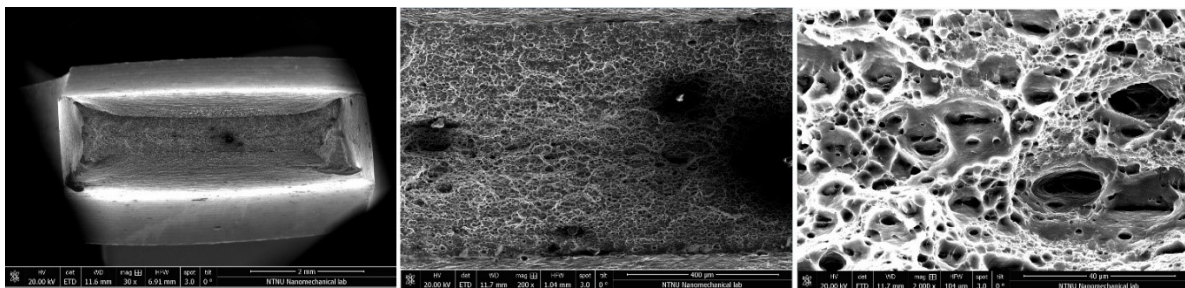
fractography of a selected specimen broken under static tension in the tensile test.
